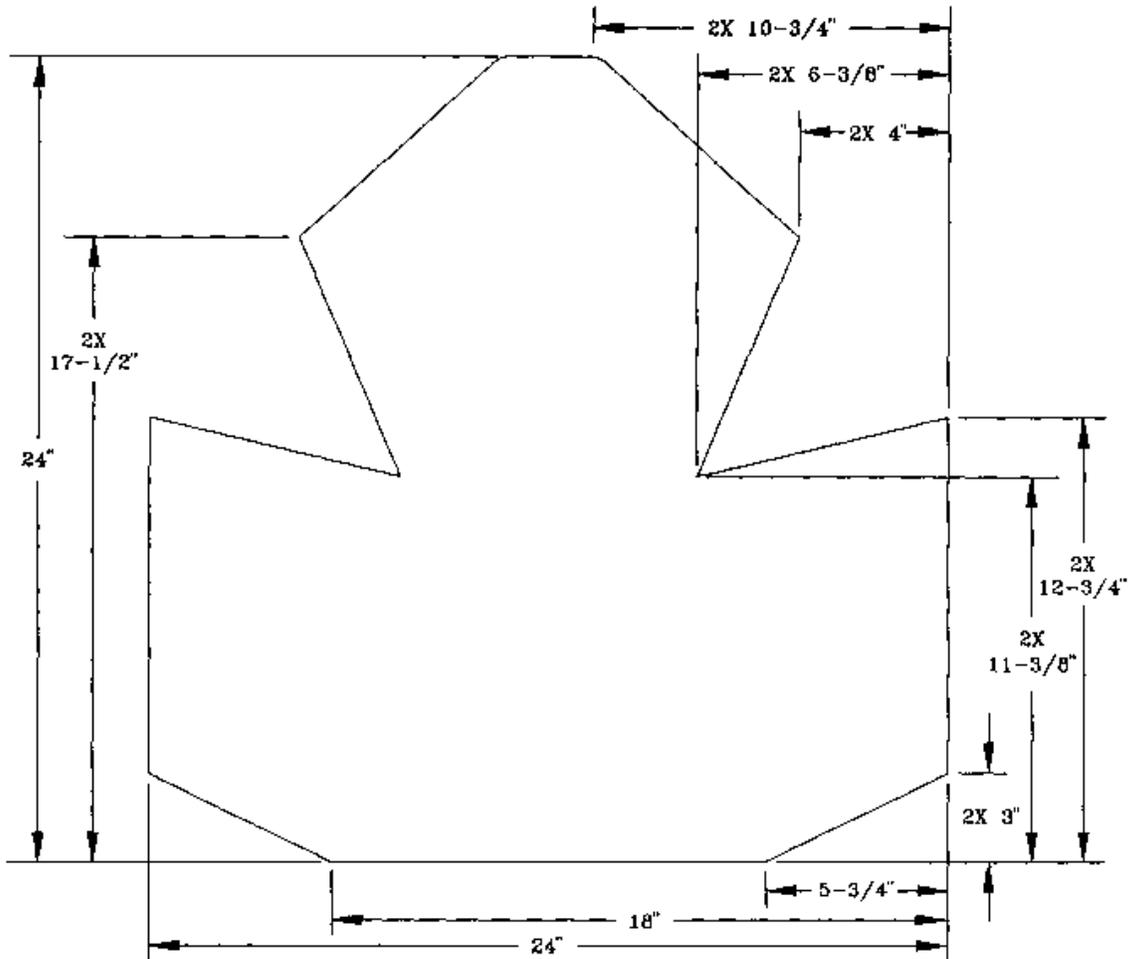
(CONTAINER SIDE MOUNTED) UPPER CAP ASSEMBLY (SHEET 1 OF 2)
